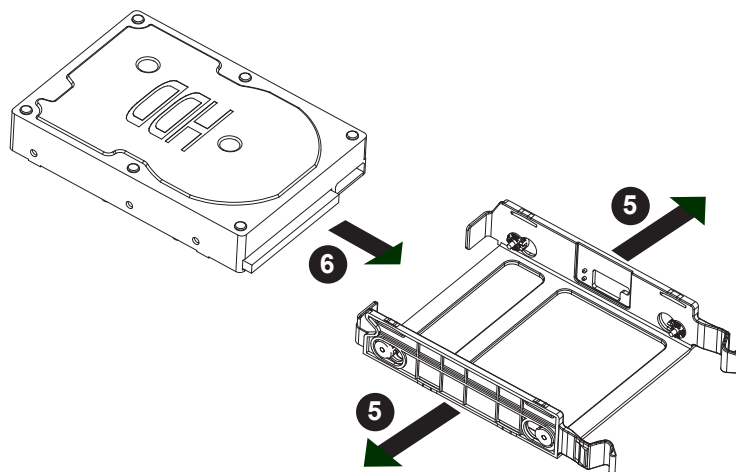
Removing a Hard Drive from a Hard Drive Carrier
